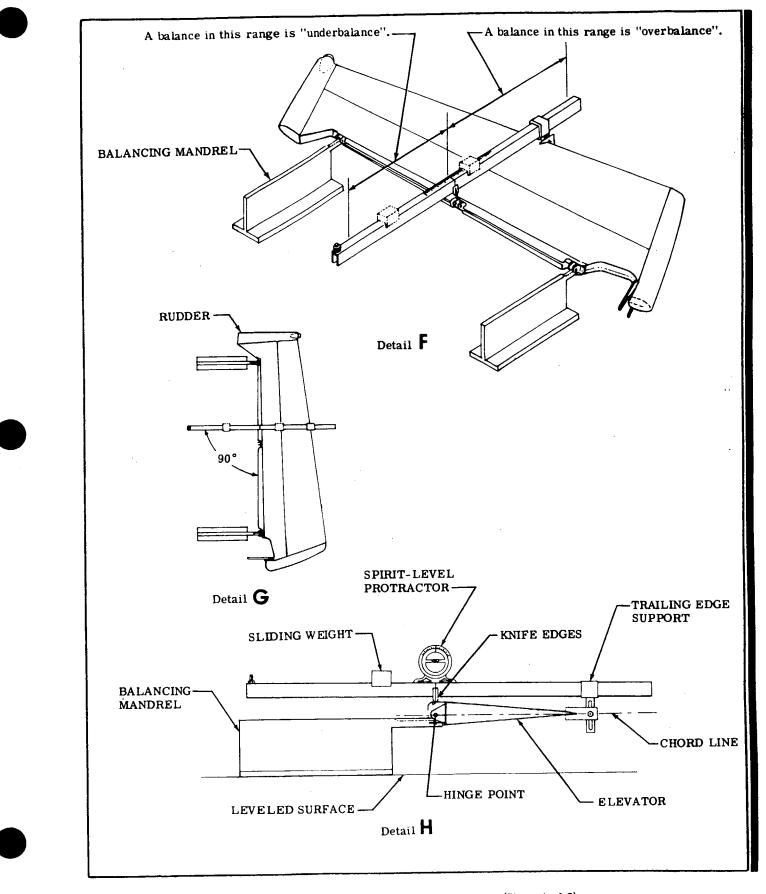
Control Surface Balancing (Sheet 4 of 5)
